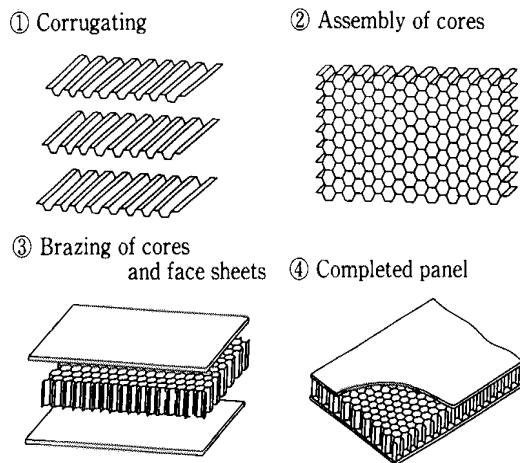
Process of manufacture, honeycomb panels      Figure 6 Production of welded panels
